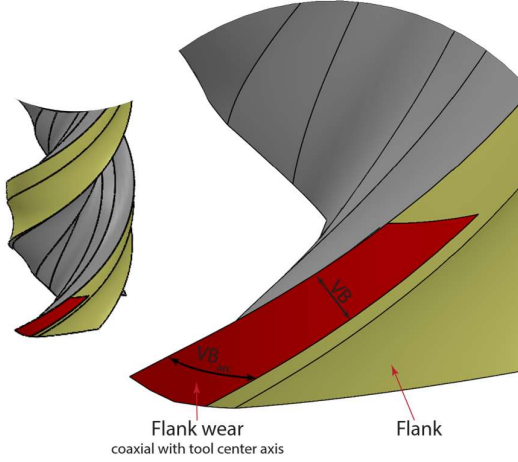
Flank wear on a milling tool (red coloured area). The flank wear land is assumed to be part of a cylindrical surface.
